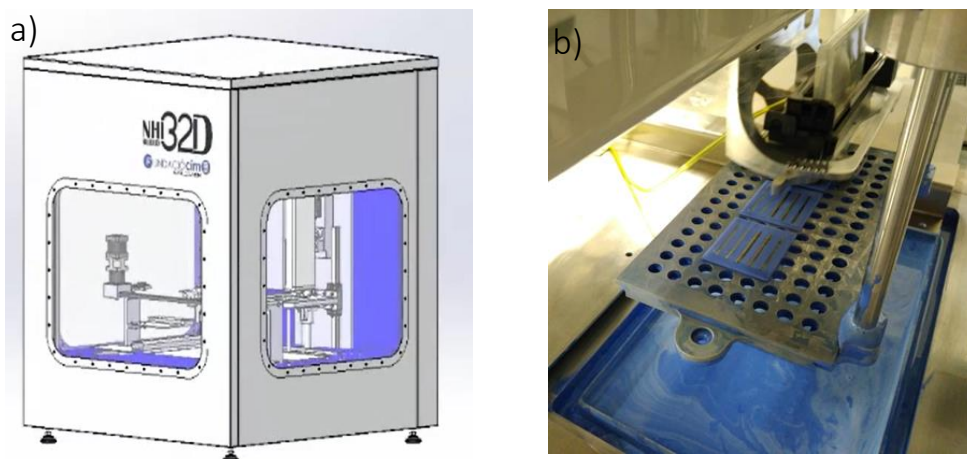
Hybrid MIP-SLA and inkjet printing technology a) CAD model and b) real image.
